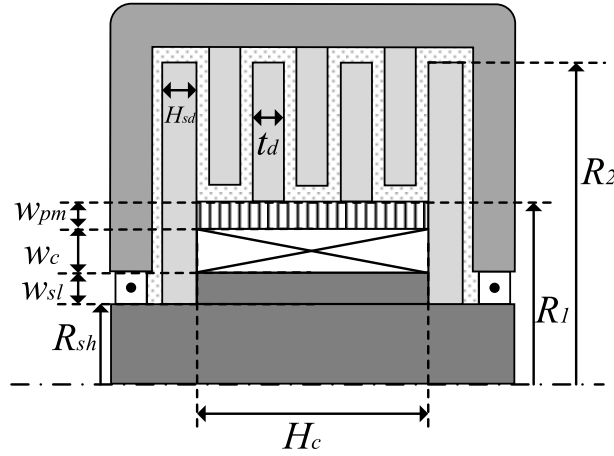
Geometry of the HMR clutch and its design parameters.
